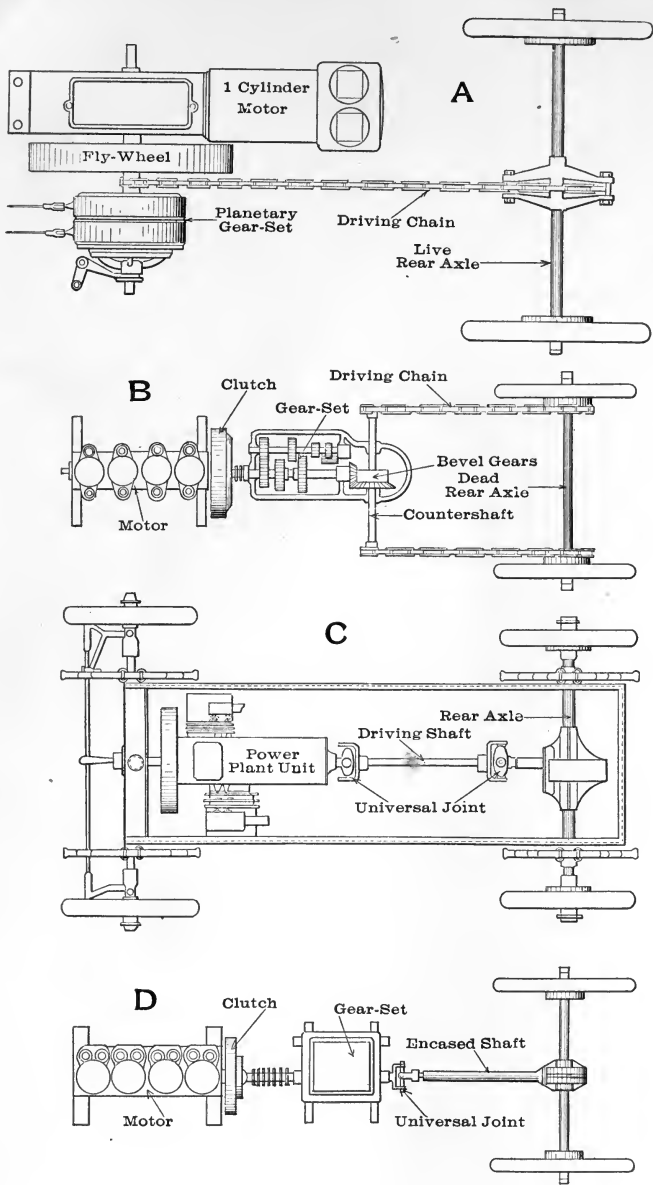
Methods of Power Transmission Employed by Motor Car Designers. A—Single Chain Drive from Planetary Gearset to Live Rear Axle. B—Side Chain System. C—Drive by Exposed Shaft Having Two Universal Joints. D—Drive Shaft Enclosed in Torque Tube Needs but One Universal Joint.
